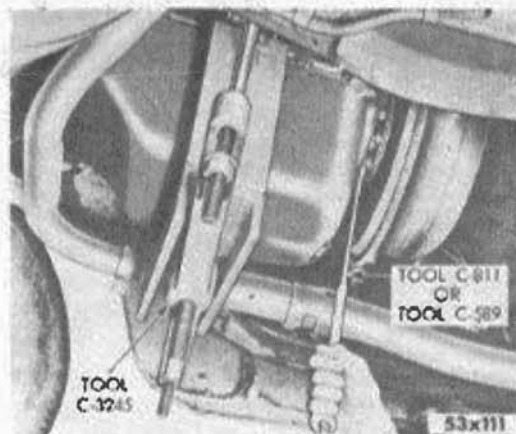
REMOVING OR INSTALLING TORQUE CONVERTER MOUNTING STUD NUTS.
